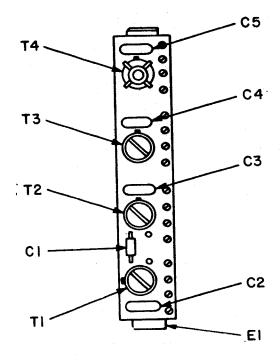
26 MHz Subassembly A2A4A16, Component Locations
